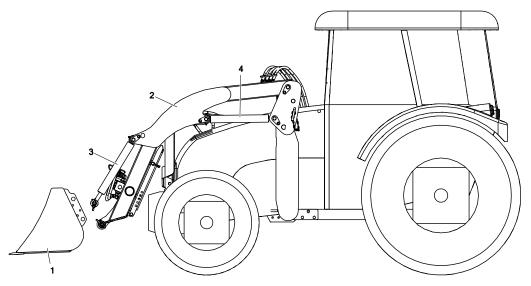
Mounting the tool mechanically: 1 – tool, 2 – loader boom, 3 – tool cylinder, 4 – boom cylinder
